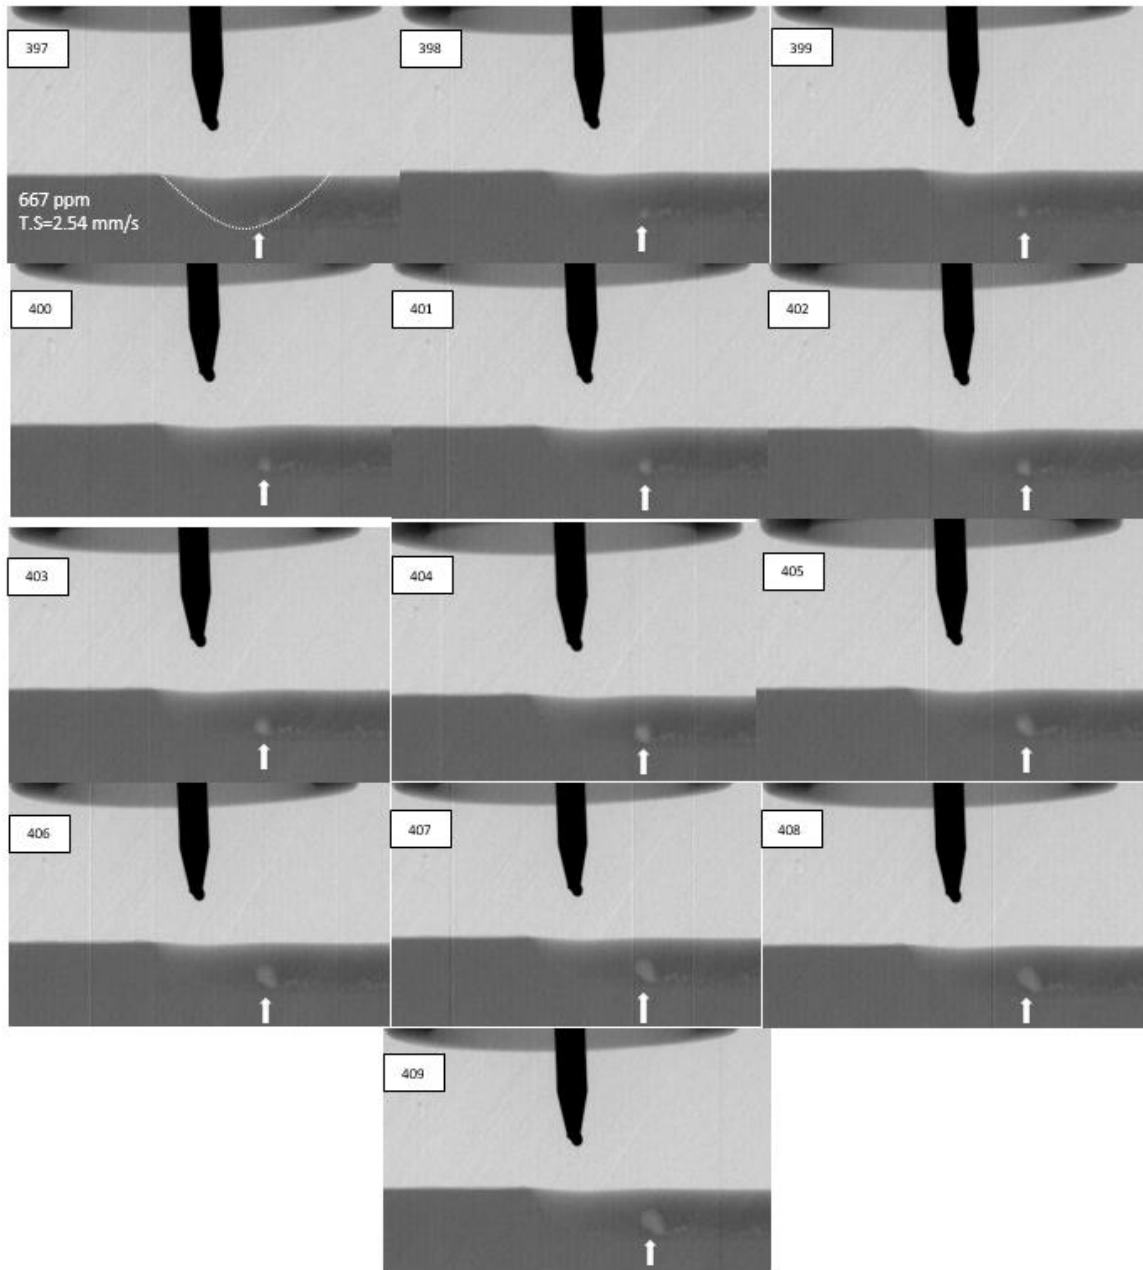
Alloy 1100 welded using 667 ppm of shielding gas hydrogen at 2.54 mm/s.
